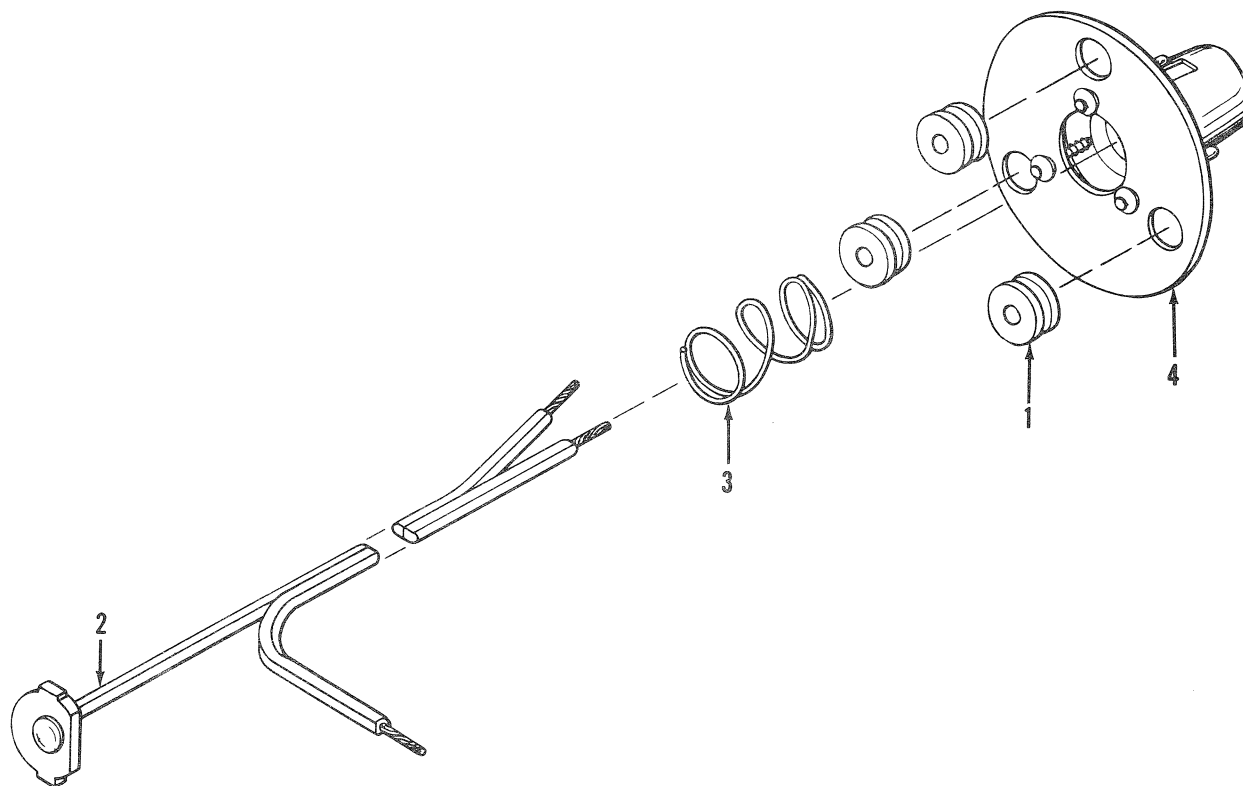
A. SOCKET ASSEMBLY - EXCITER LAMP
